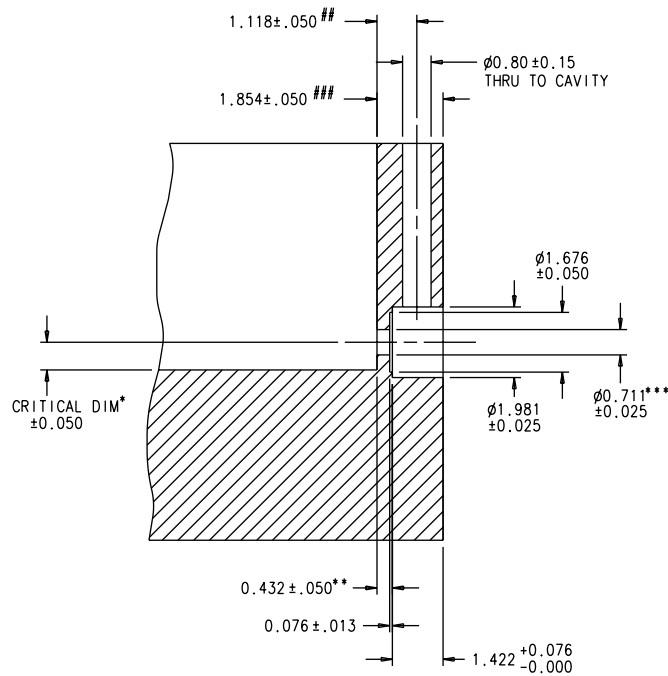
Machining Dimensions for V103M-012 Connector Mounting Holes
